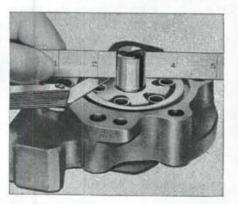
Maximum clearance between rotor and cam ring is 0.0016 when measpred as shown.
